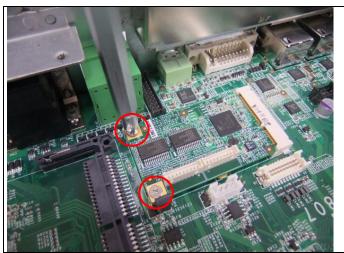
Insert Mini PCI-E module and fixed with two M2 screws.
